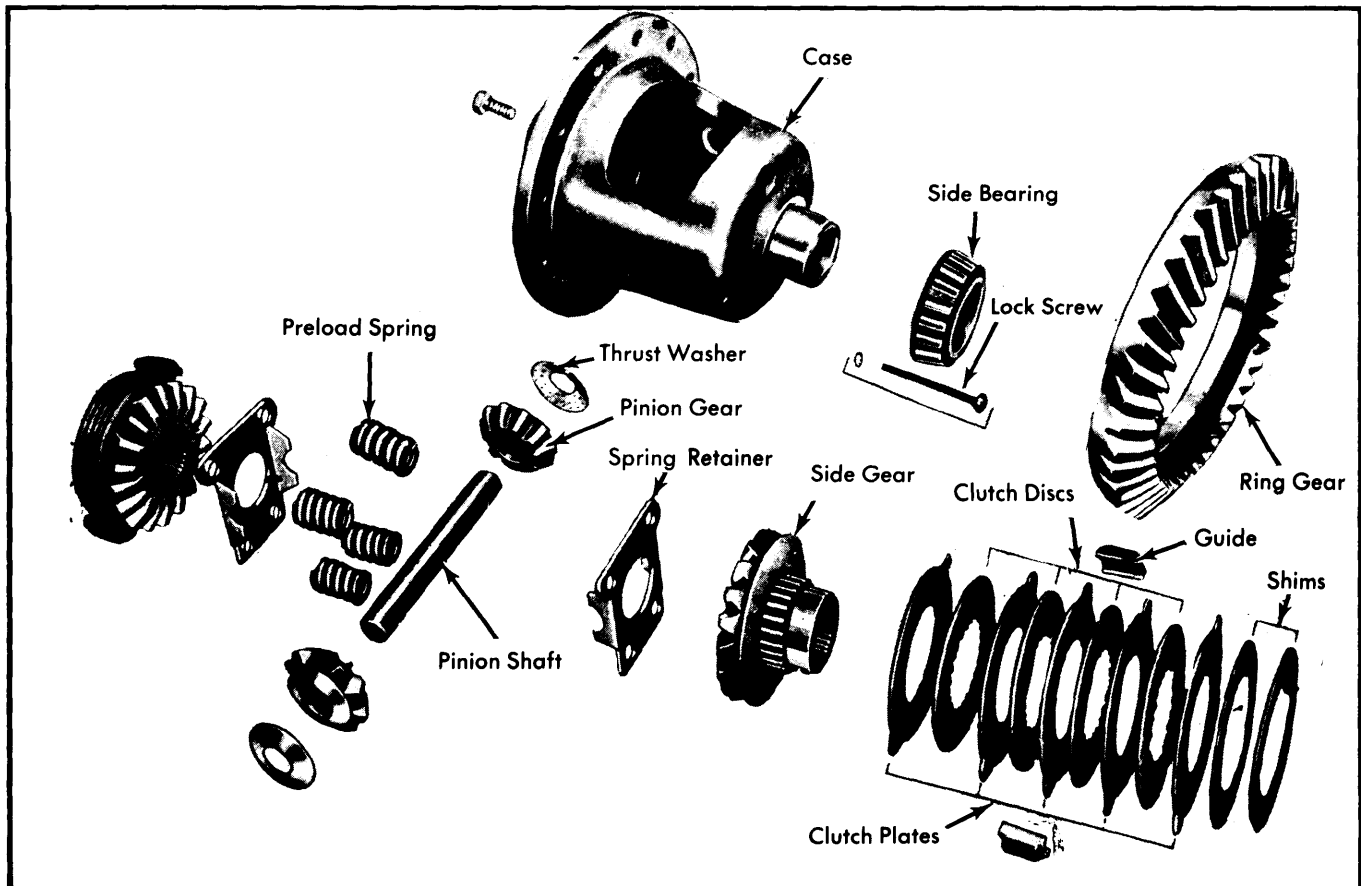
Exploded View of Positraction Unit (Coil Type Preload Spring)
